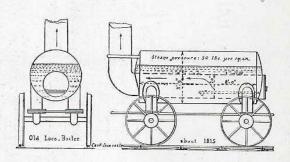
OLD LOCOMOTIVE BOILER, 1815.
